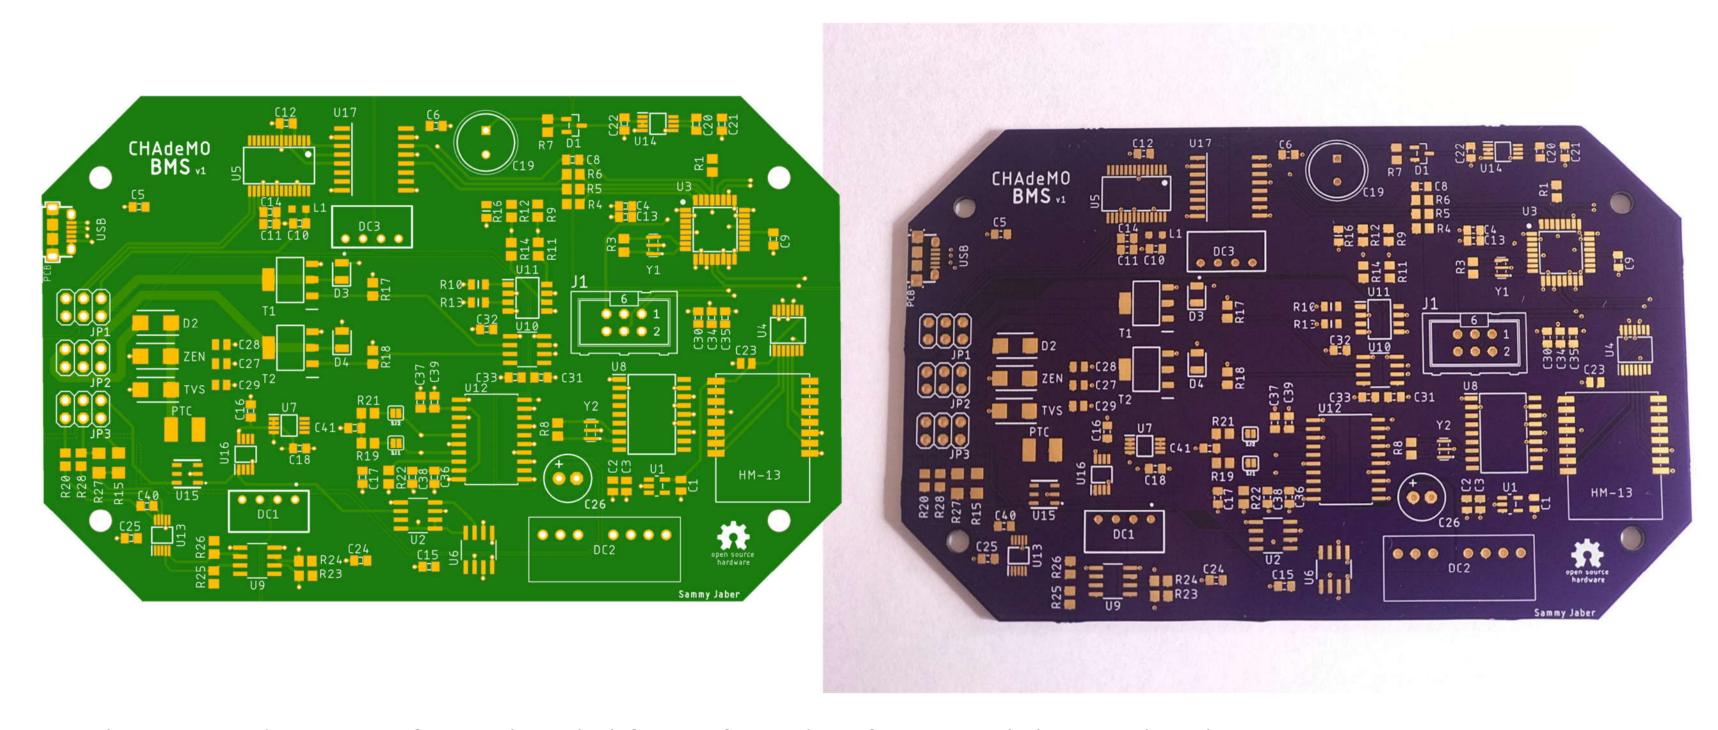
2 layer PCB. 2D design output from Eagle on the left. Manufactured PCB from OSHpark shown on the right.
